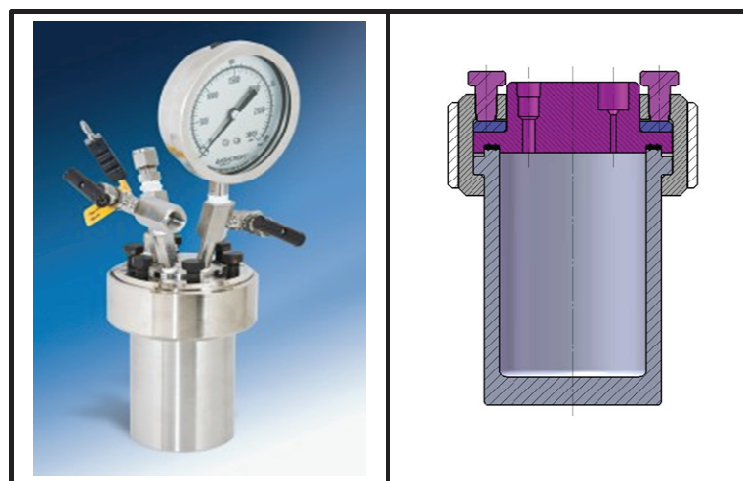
Left: Pressure vessel system with installed pressure gage, valve, rupture disc and thermocouple assembly. Right: Schematic cross section of the pressure vessel showing the split-ring clasp [57].
